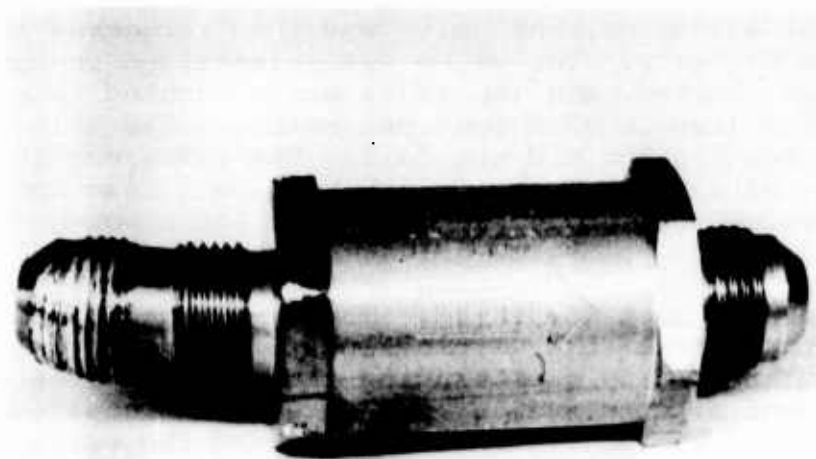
View of A1-1/2 Valve After Static Bending Test.
